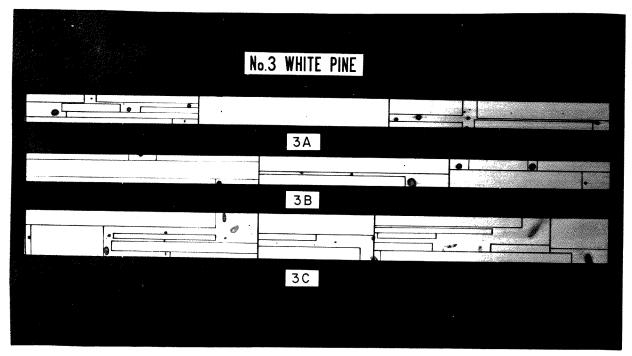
Cutting layout on selected No. 3 White Pine boards. Yields for these boards were: 3A - 84.9%; 3B - 77.6%; 3C - 68.4%.
